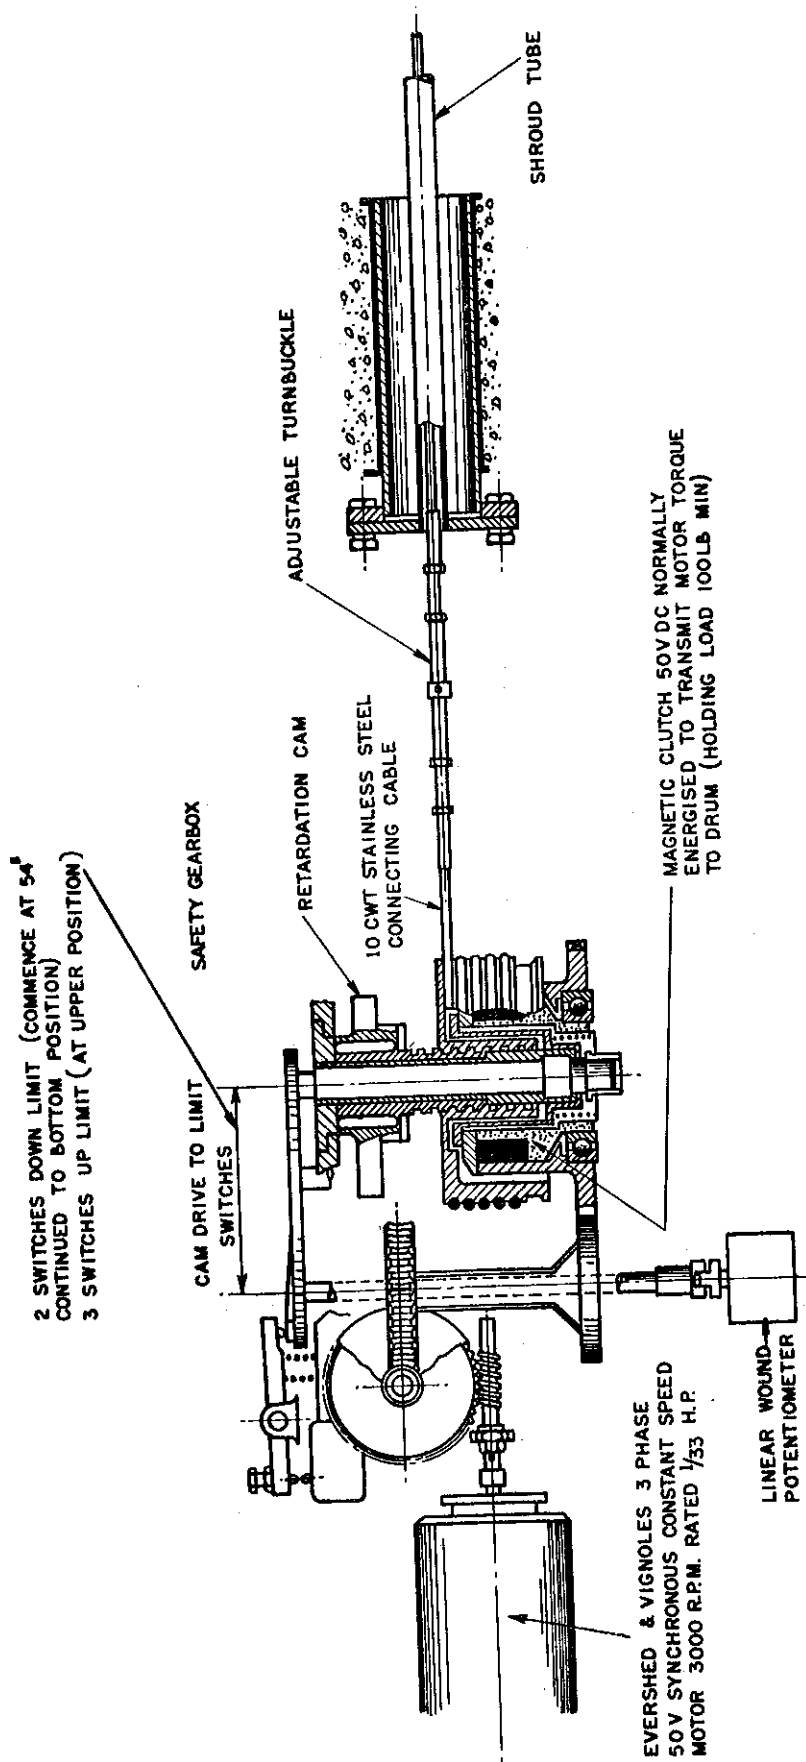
GEARBOX AND MOTOR FOR SAFETY ROD
